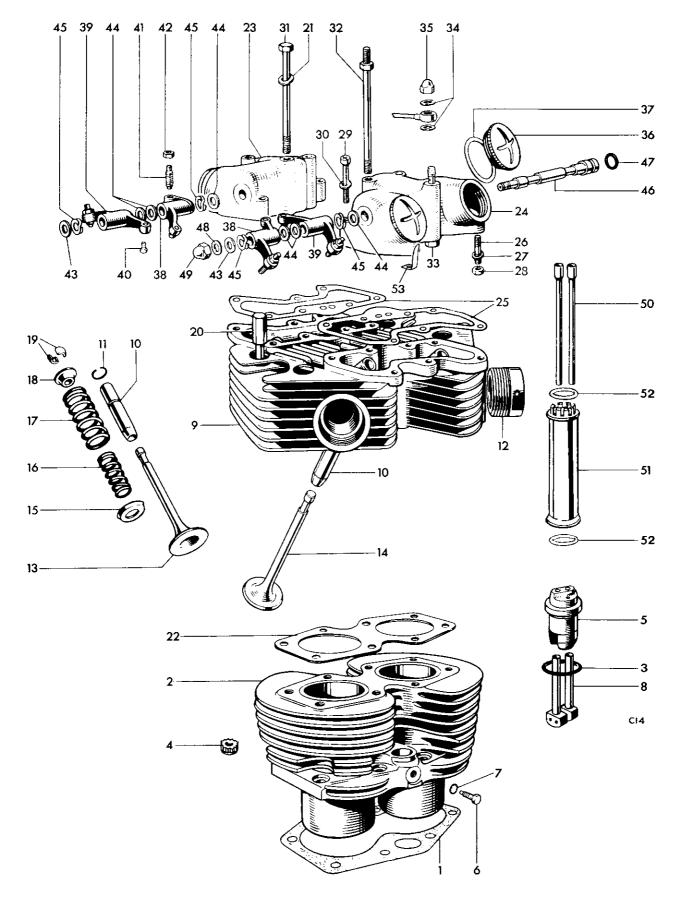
CYLINDER BLOCK AND HEAD, T90
